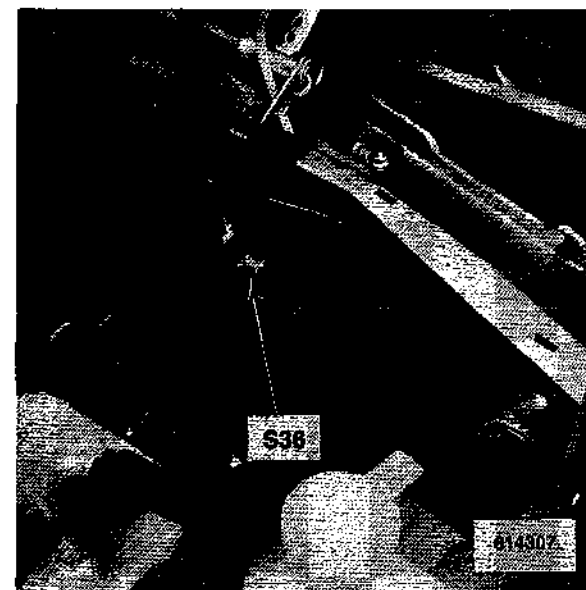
Top RH Side Of Radiator (M5 Engine Shown; M20 And M30 Engines Similar)
